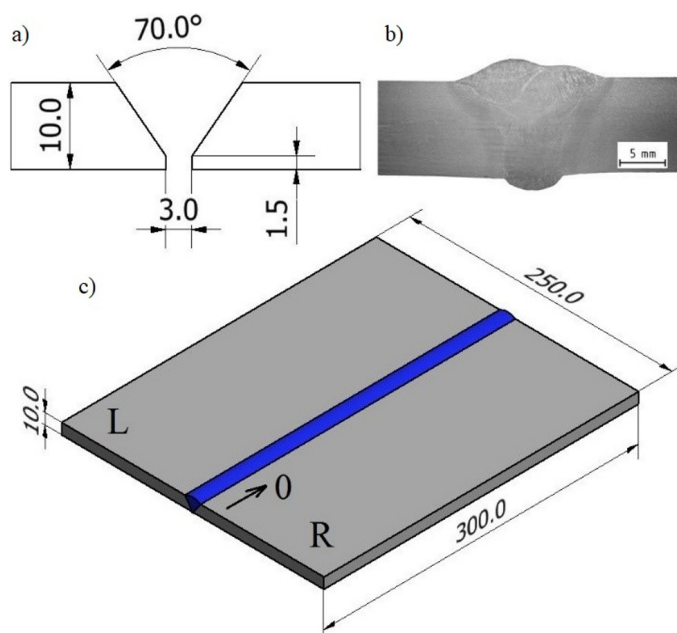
Experimental sample: a) weld joint preparation, b) weld macrostructure, c) sample dimensions
